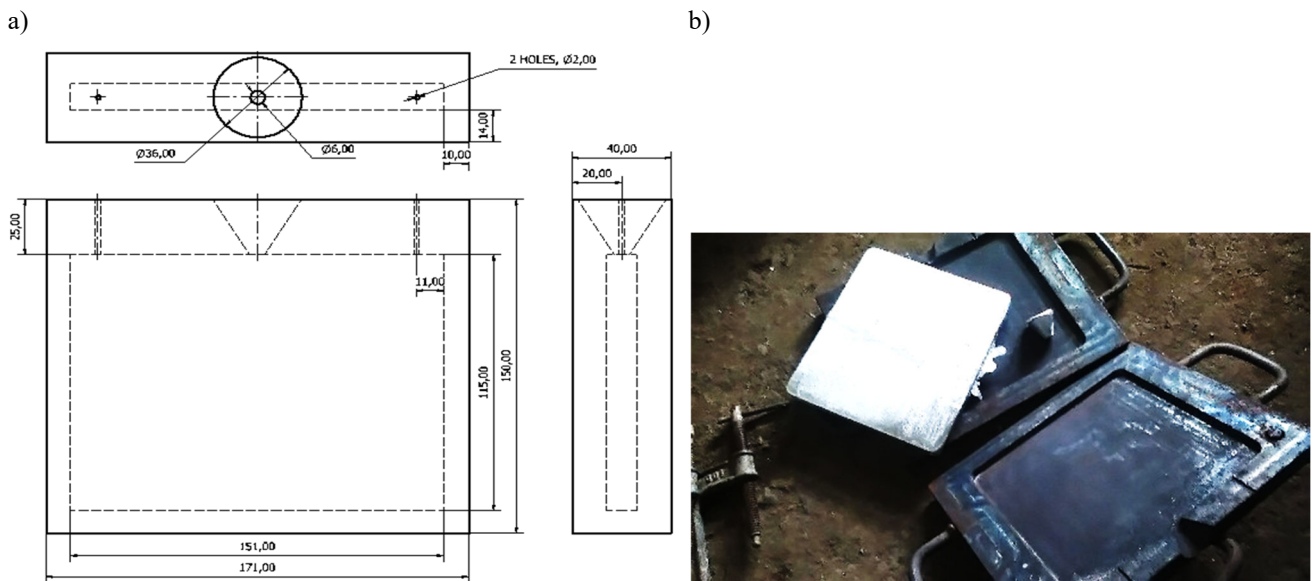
a) Dimensional details of steel moulds and b) cast products
